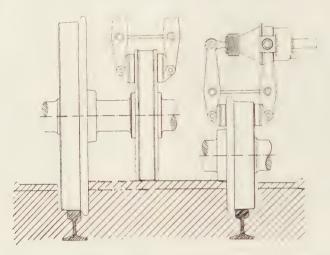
Standard 1 000 mm diameter wheel and « small wheel » of 600 mm diameter with worn tyres, within the vehicle loading gauge. Possibilities of fitting a brake disc.
